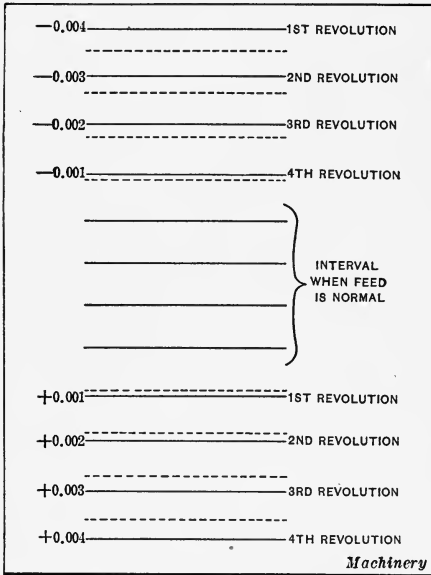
Diagram showing how Spring in Drilling Machine causes Excessive Rate of Feed, which may break the Drill
